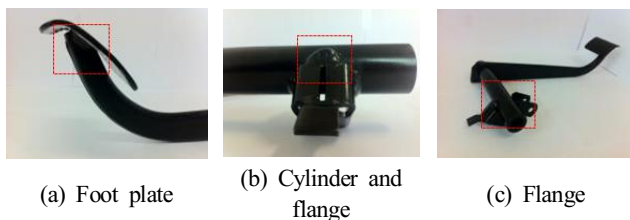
Welding joining in brake pedal of Volvo heavy truck
